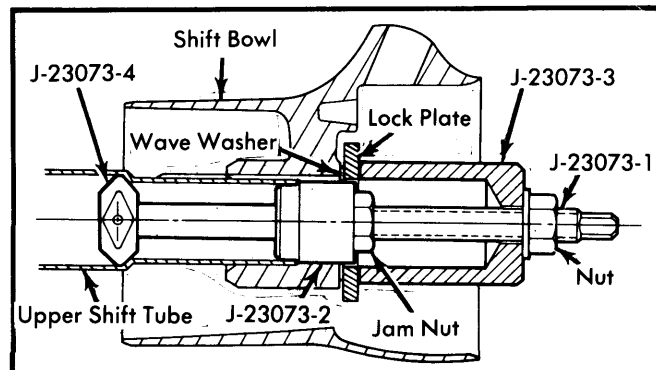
Shift Tube Installation. Install Tool as Shown and Turn Nut to Press Shift Bowl onto Tube.
